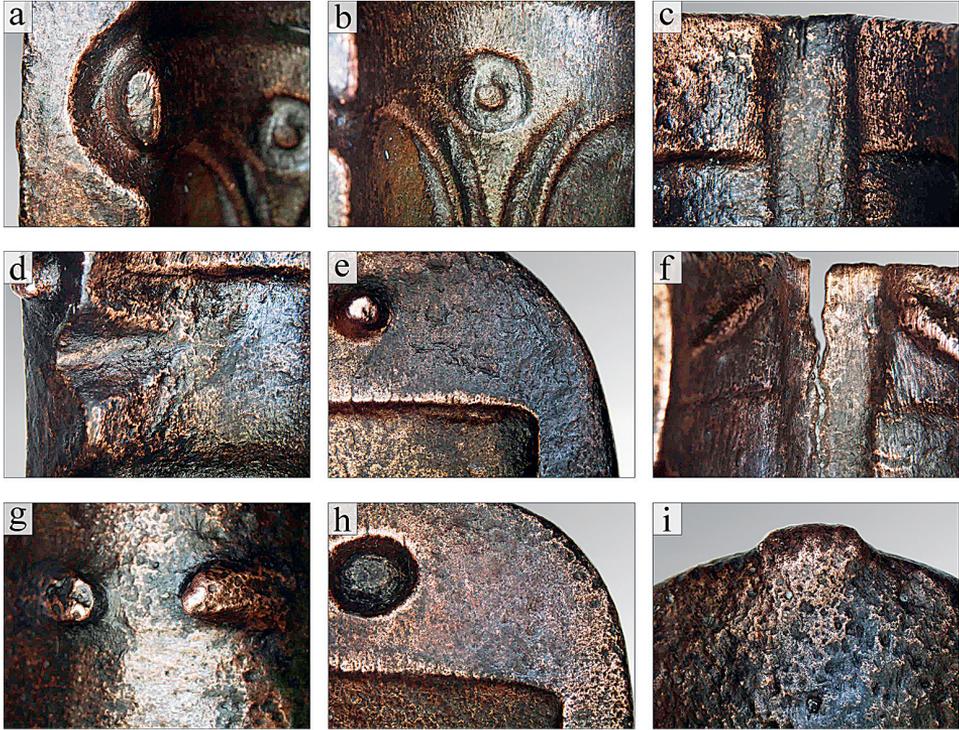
The macrostructures of the casting mould from Elgiszewo: a – loop negative; b – orante motif negative; c – feed channel; d – neck part with a cut-off line; e – peg; f – split; g – broken knob; h – peg hole; i – casting porosity.
